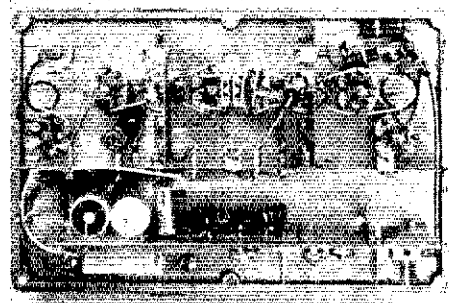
The inside of the transmit converter. Coil dimensions are given in the parts list and in Table 1.
